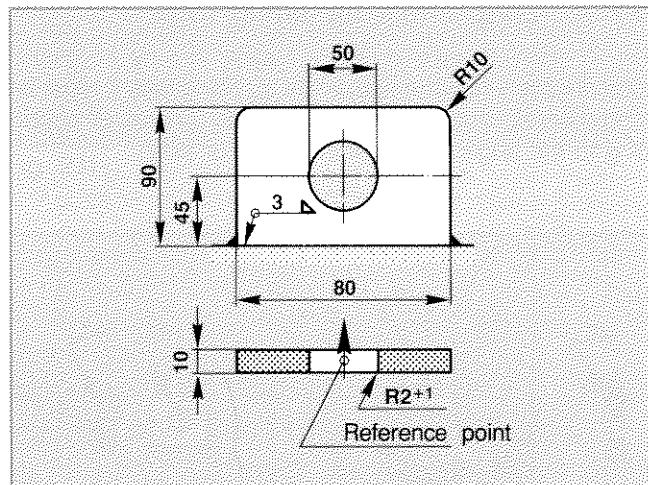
Lifting lug Type C for attaching hooks to vertical and horizontal surfaces
